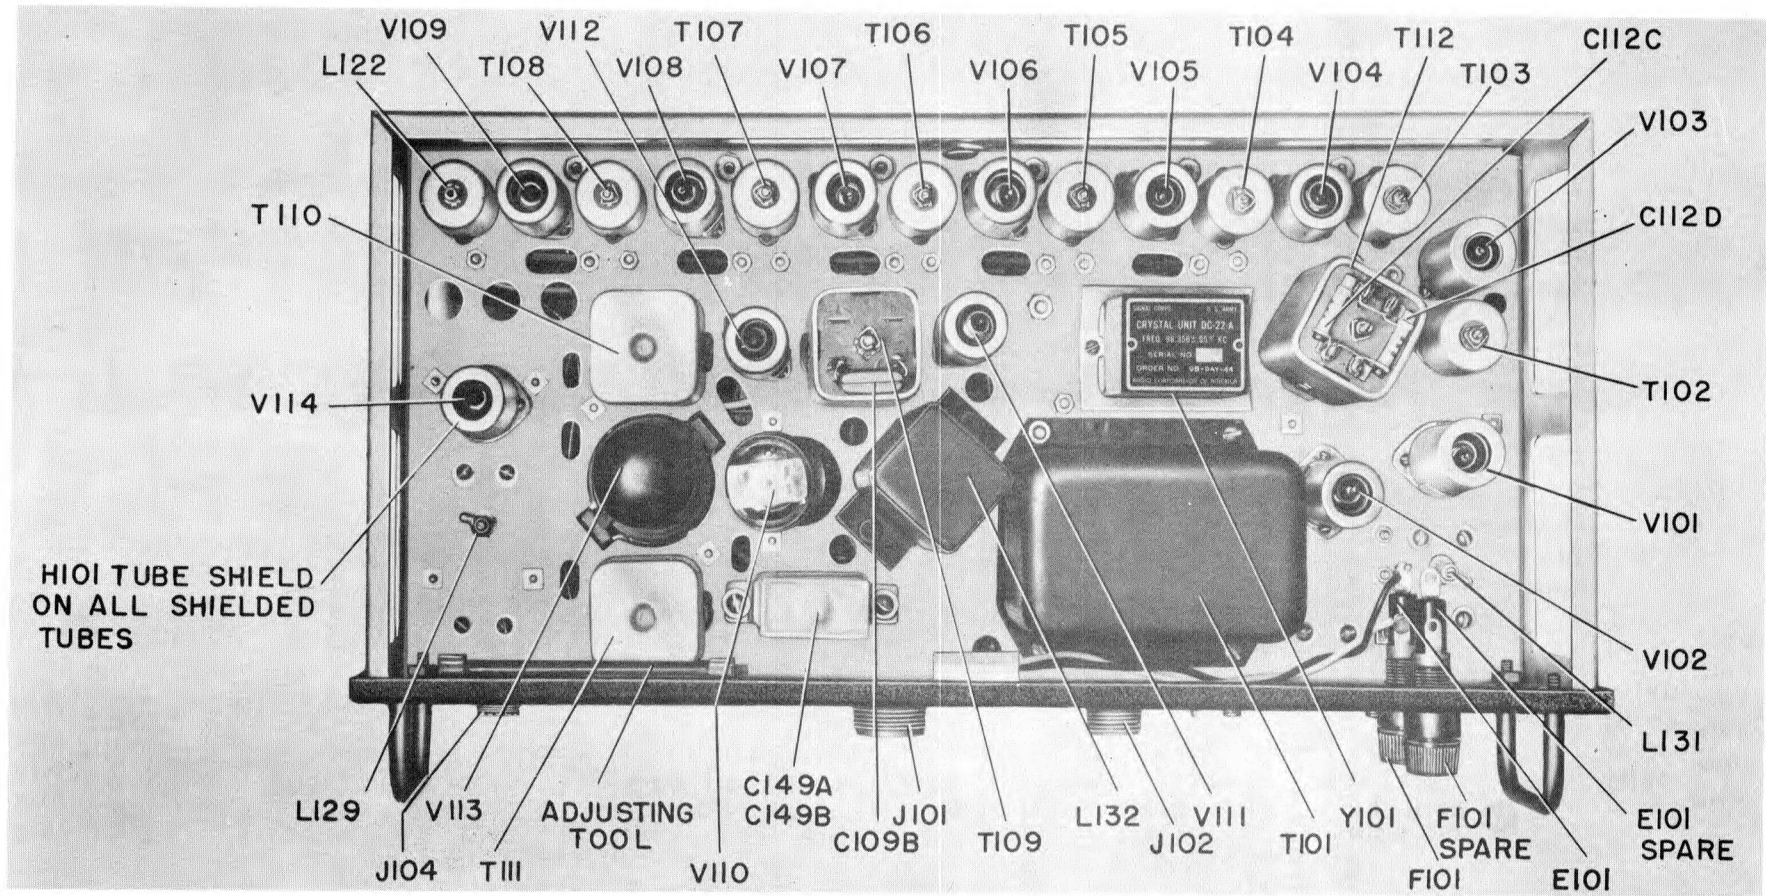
Receiver-Transmitter, Top View, Showing Location of Parts
